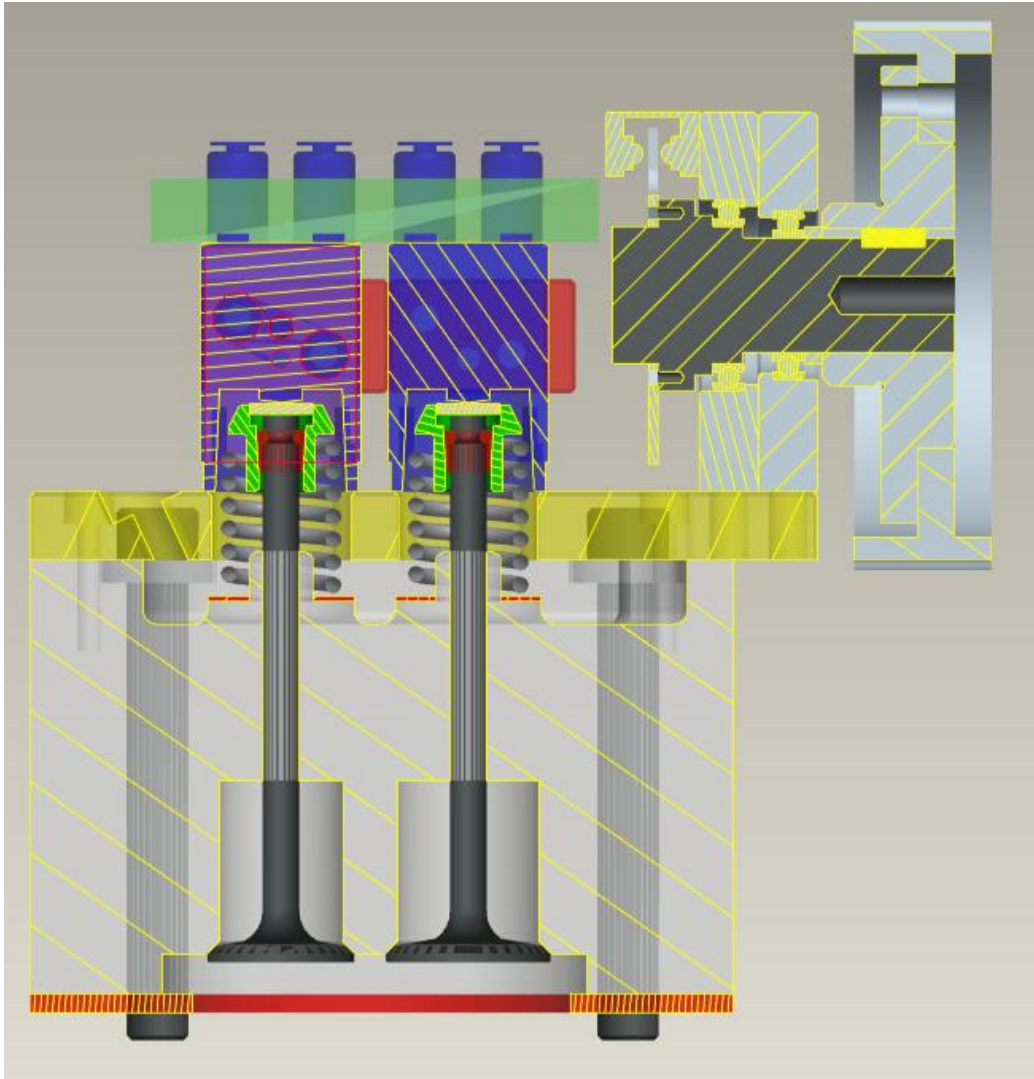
Pro Engineer Cross-Sectional Rendering of The FVVA Valvetrain.
